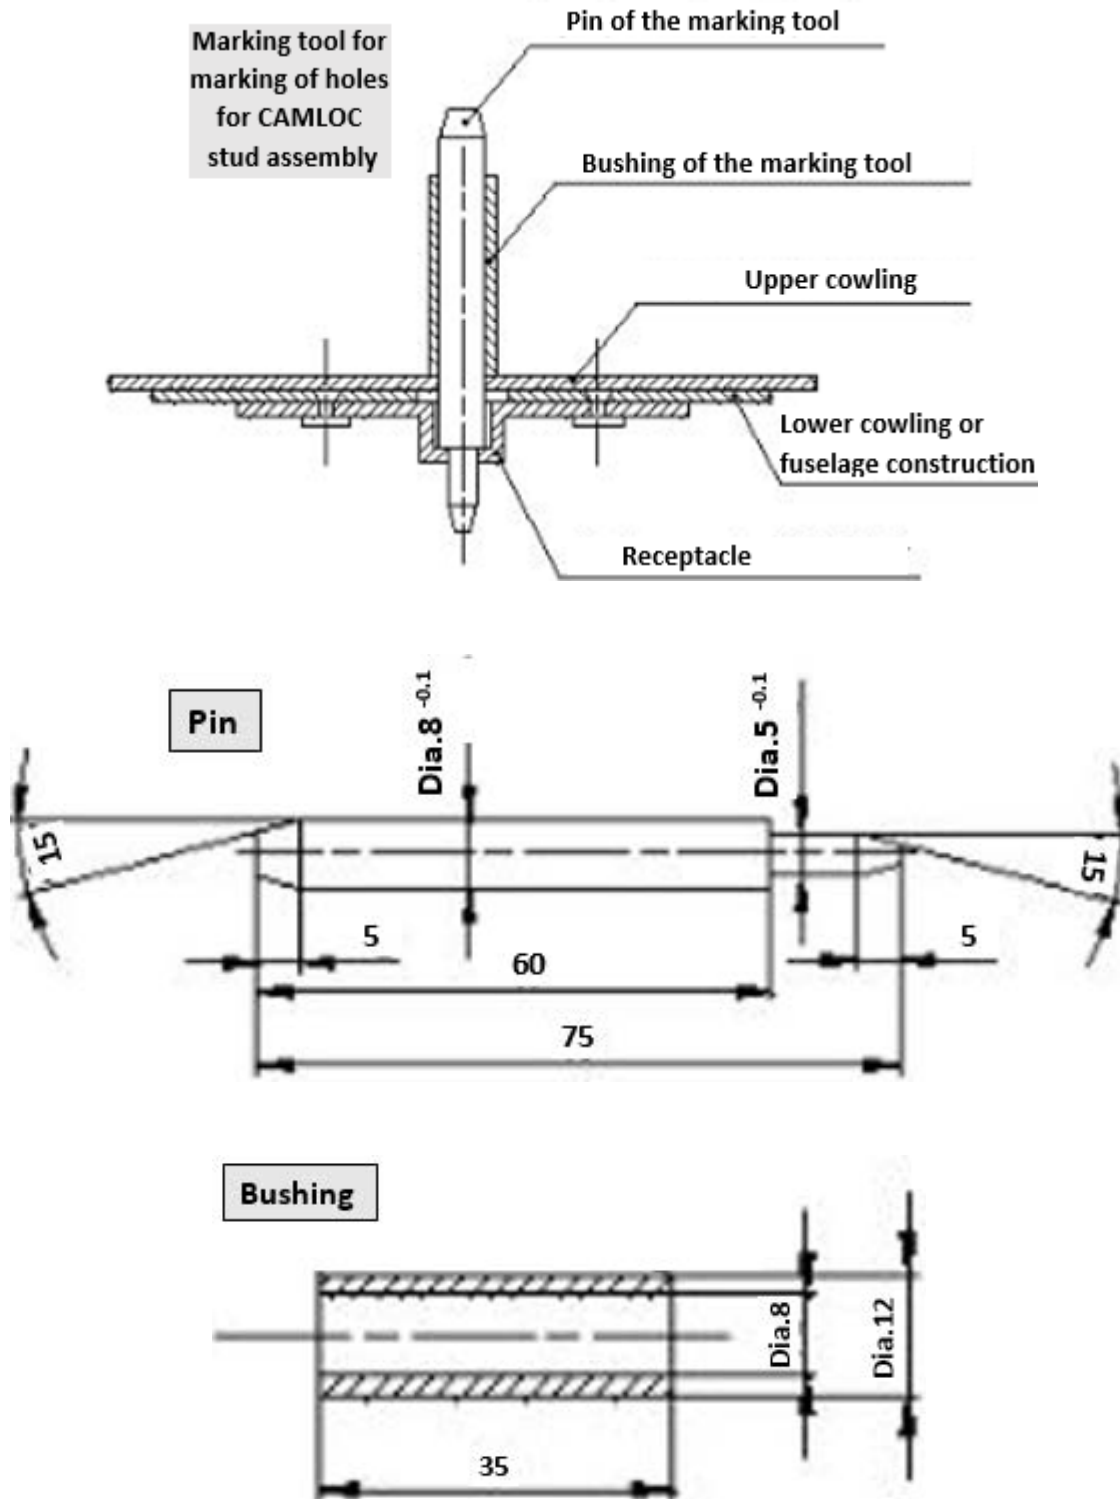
Marking tool for marking of holes for CAMLOC stud assembly
